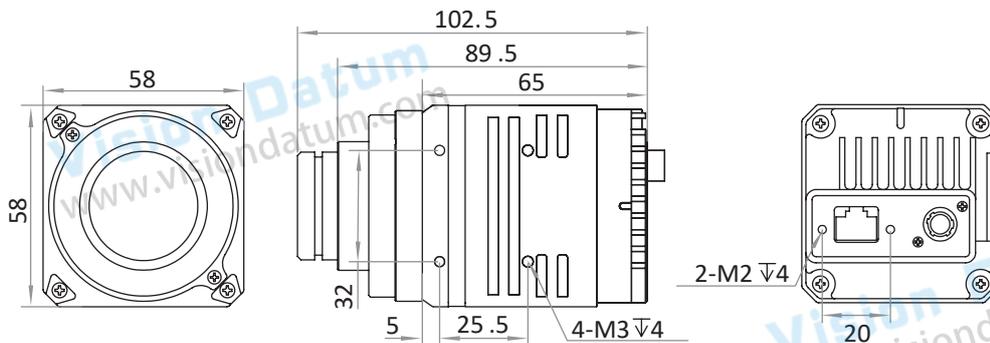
Mechanical Dimensions (in mm) of the GigE Cameras with 15mm focal length lens housing (The installation uses M2 and M3 screws).
